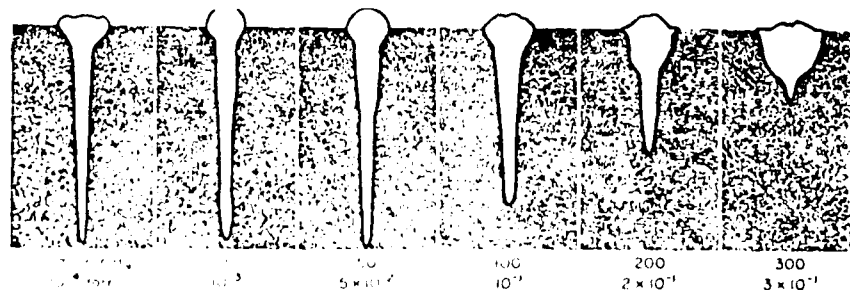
EFFECT OF WELDING CHAMBER PRESSURE ON PENETRATION AND WELD SHAPE
